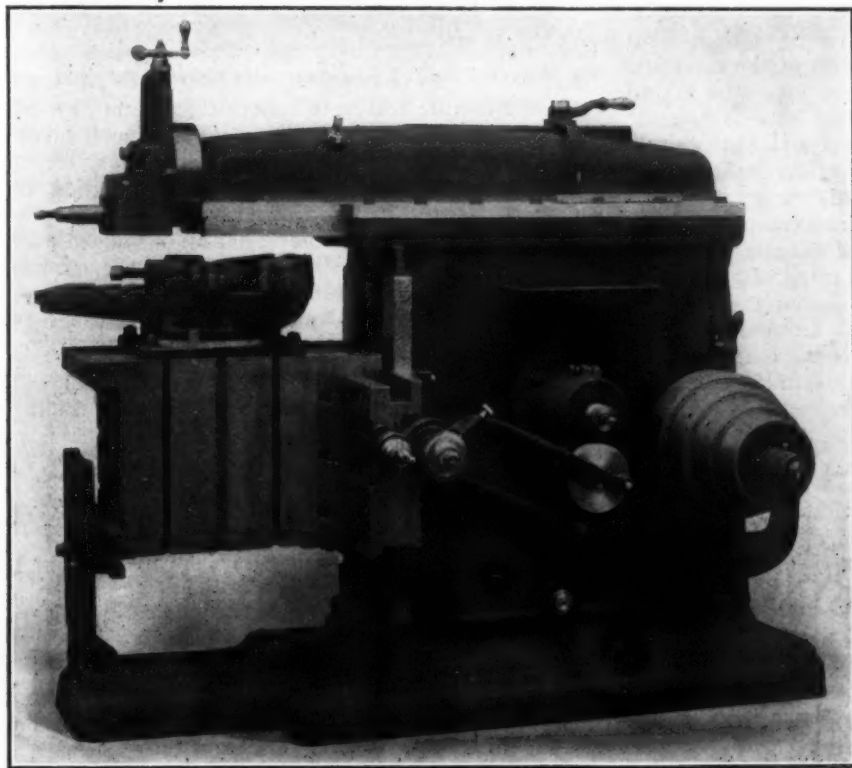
The Improved 24-In. Back-Geared Crank Shaper Built by the Queen City Machine Tool Company, Cincinnati, Ohio.
